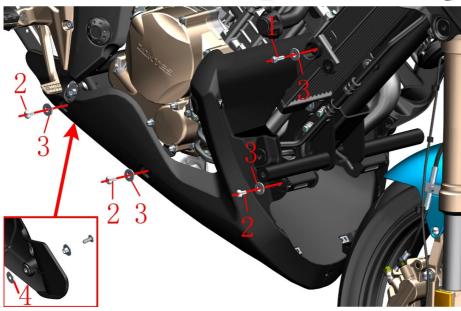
SURROUNDING		Lower shroud assembly 1	CHK	Q
